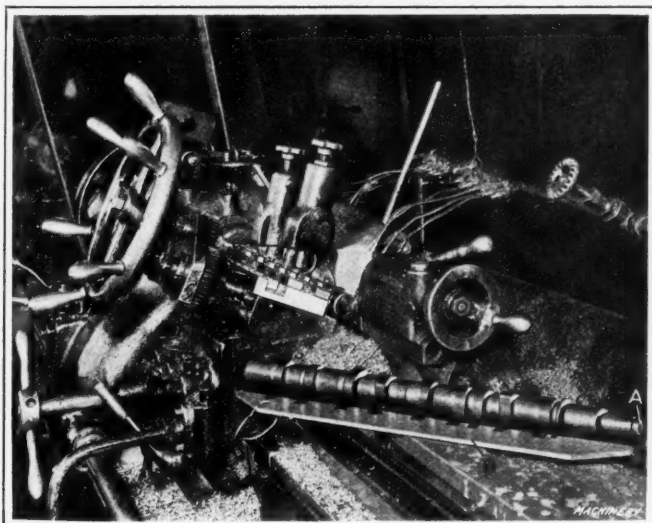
Fitchburg "Lo-Swing" Lathe provided with Eighteen Tools for facing to Width Cams, Bearings, Pump Eccentric and Collar on Cam-shafts
